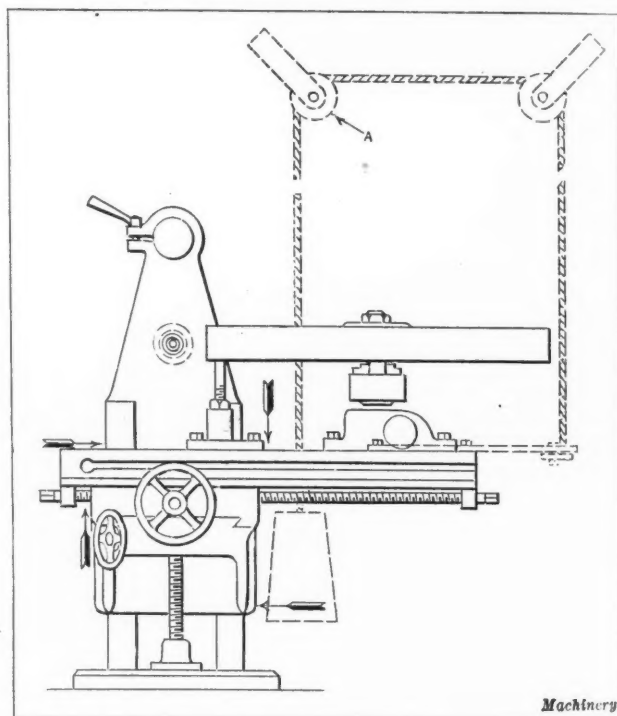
Method of balancing Overhanging Work on Milling Machine Table
